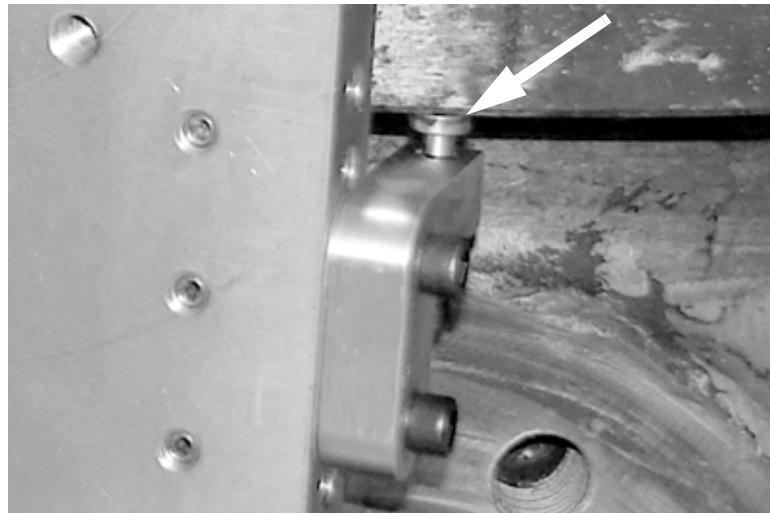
Turn the clamping screw by hand to snug the head of it against the flange. Repeat on the other side of the saddle.
